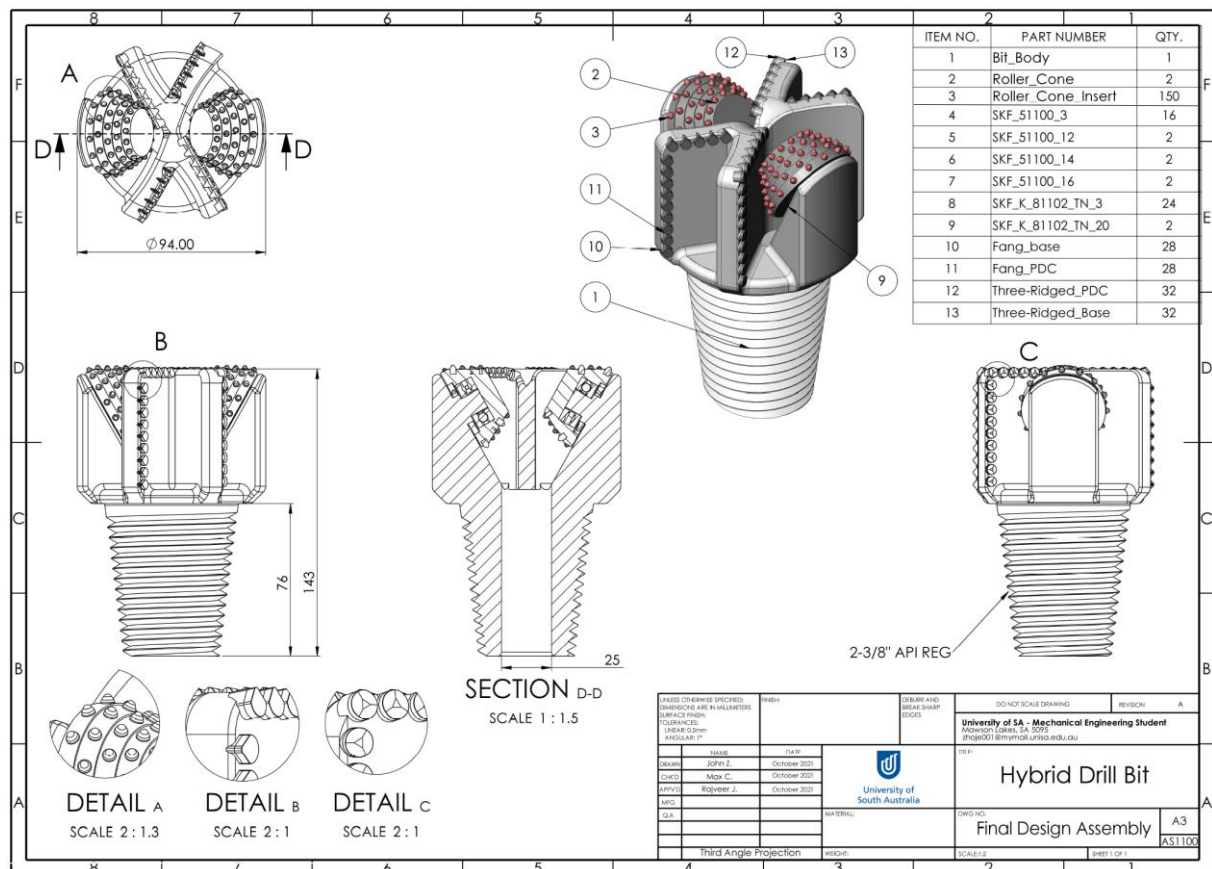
Hybrid dual-cone drill bit - assembly drawing with BOM
